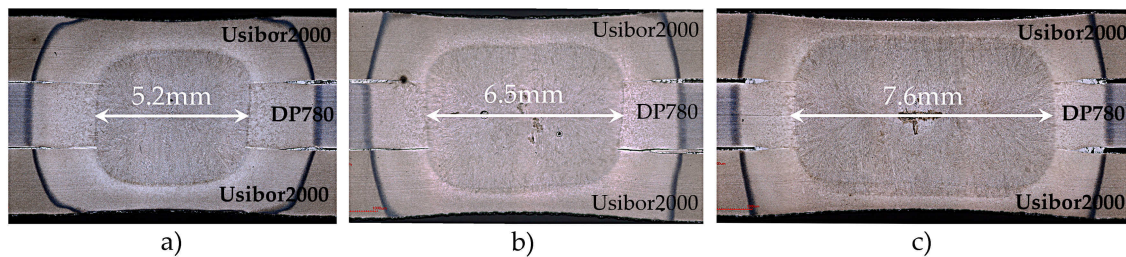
Usibor2000 1.5 mm/DP780 1.5 mm triple-sheet spot weld assembly cross section for three welding intensities: a) lower end 4.5 kA, b) middle 5.8 kA and c) upper end 7.0 kA.
